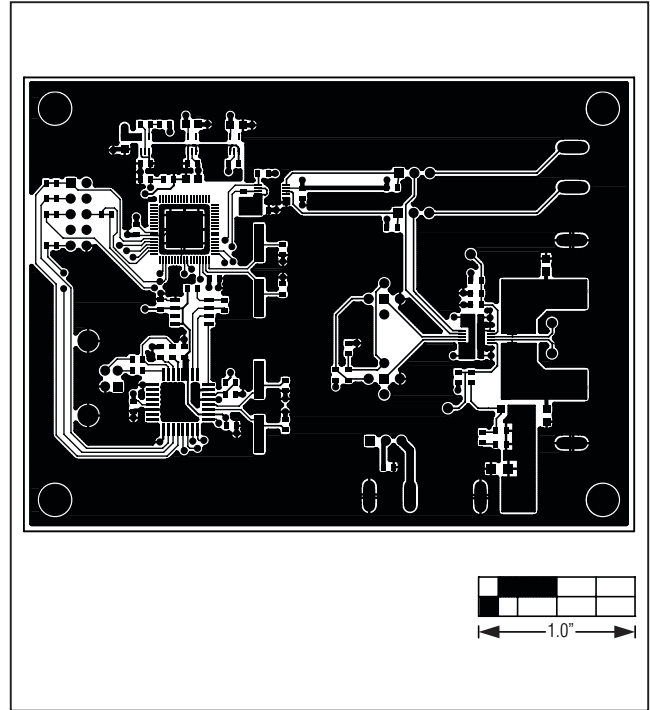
MAX9611 EV Kit PCB Layout—Component Side
